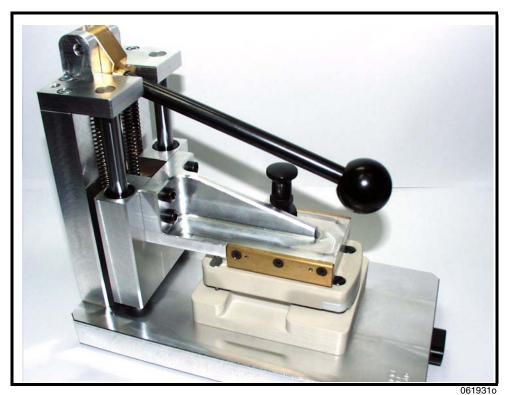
El Mylar and Acoustic Gasket Press Fixture Closed
